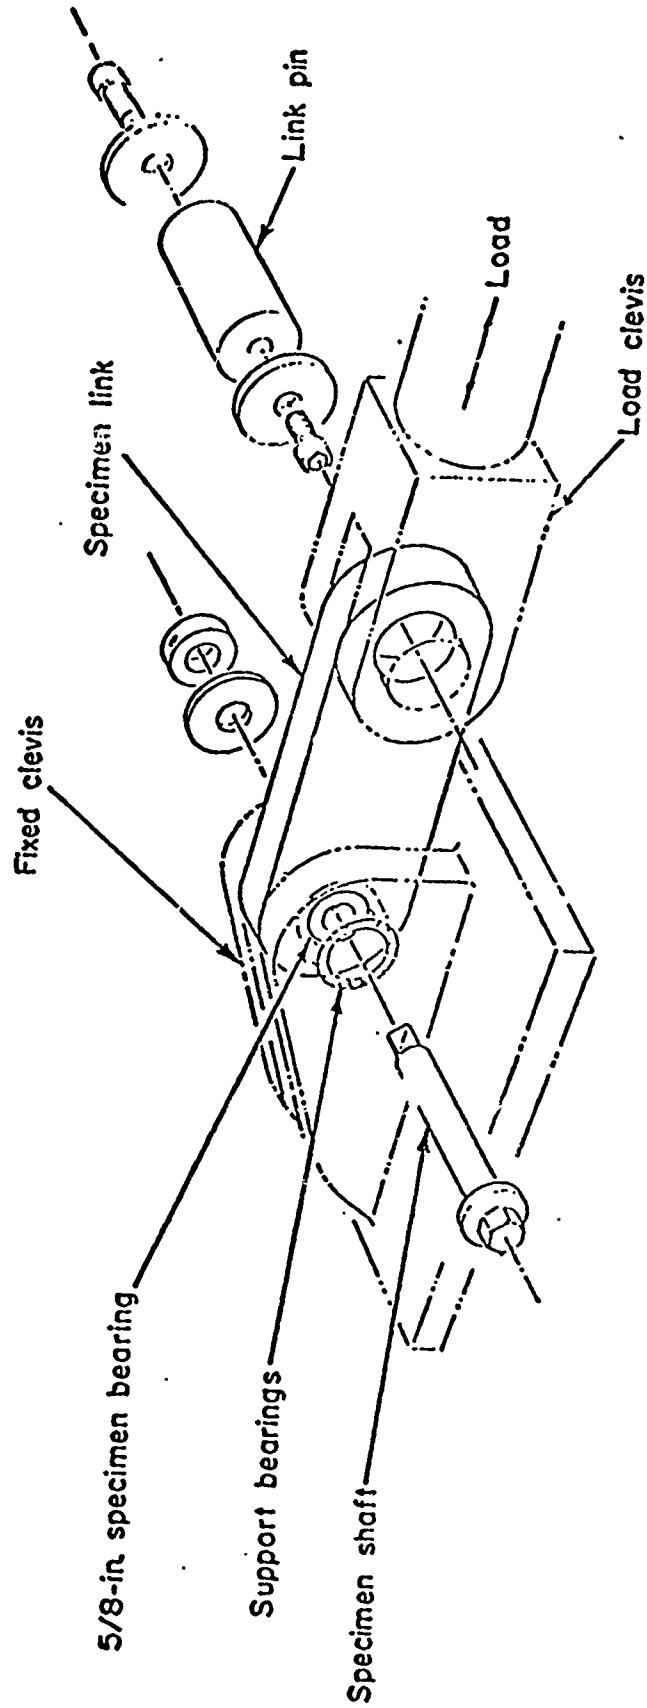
LINK AND CLEVIS CONFIGURATION FOR TEST BEARING
